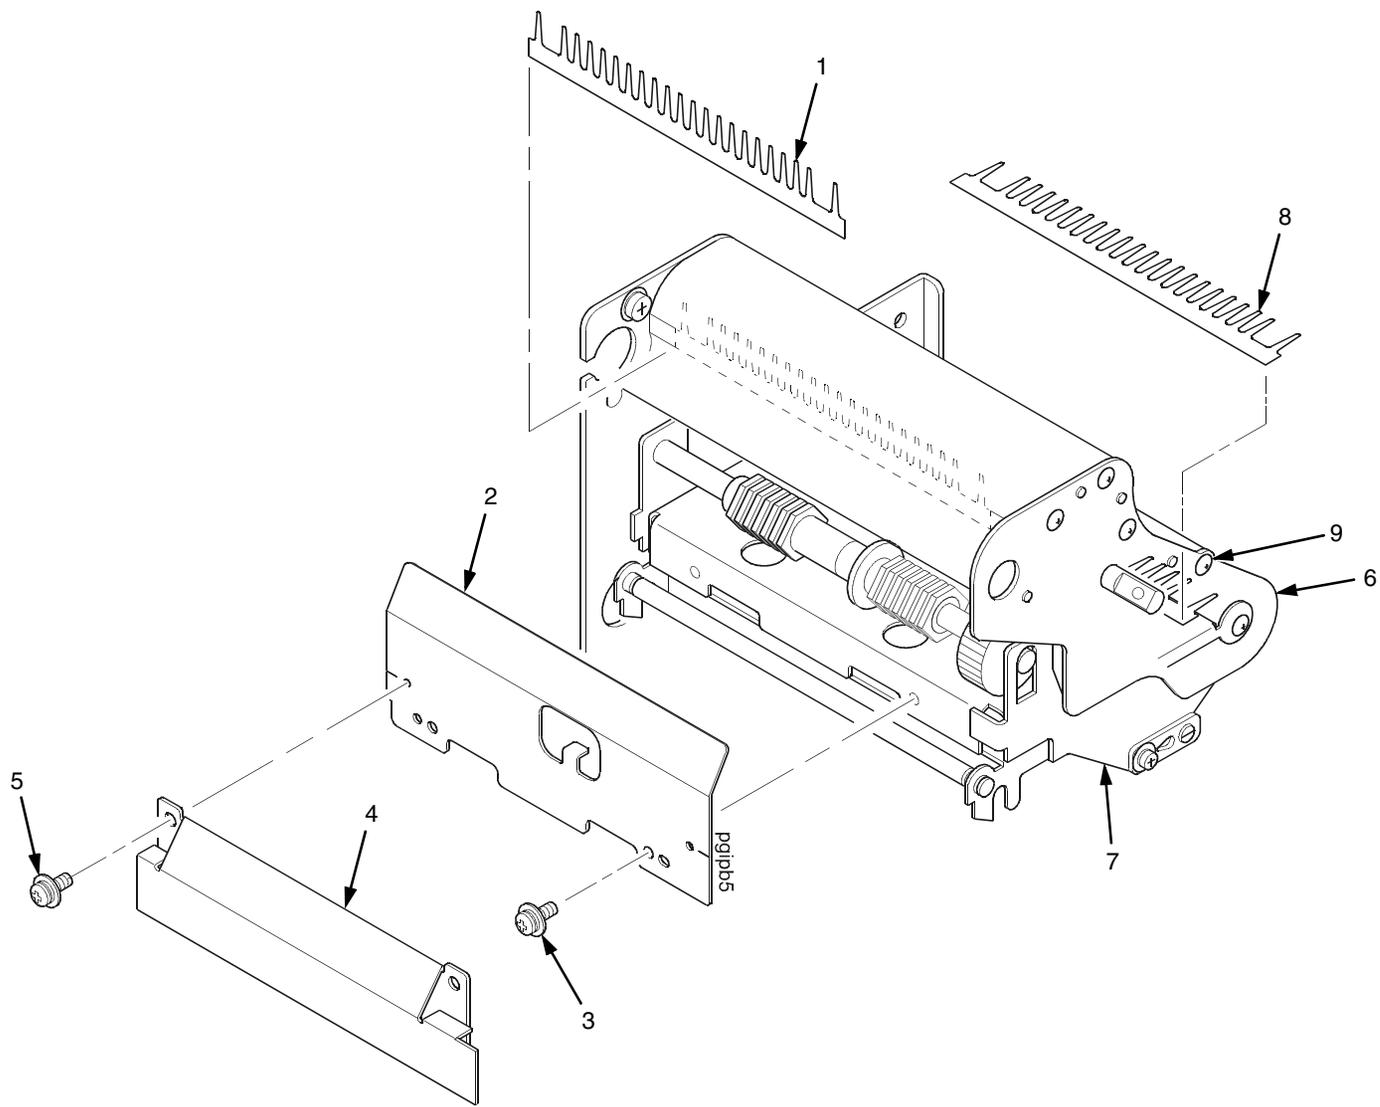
This illustration is an exploded view of the anti-static brush and ribbon adjust plate.
